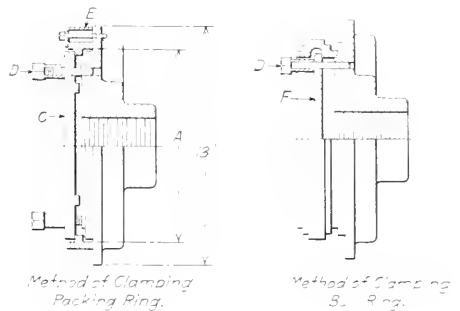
Chuck for Finishing Valve Chamber Packing Rings and Bull Rings
